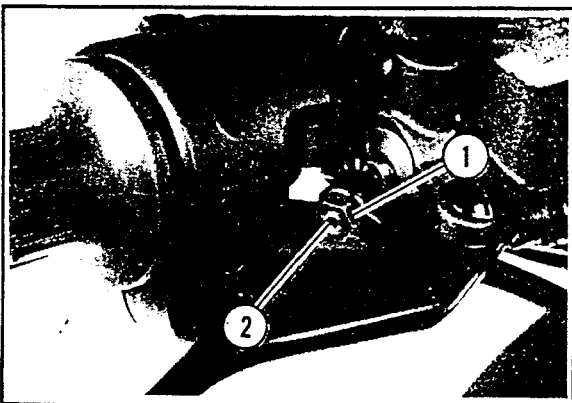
Front Brake Control Lever Free Play Adjustment
